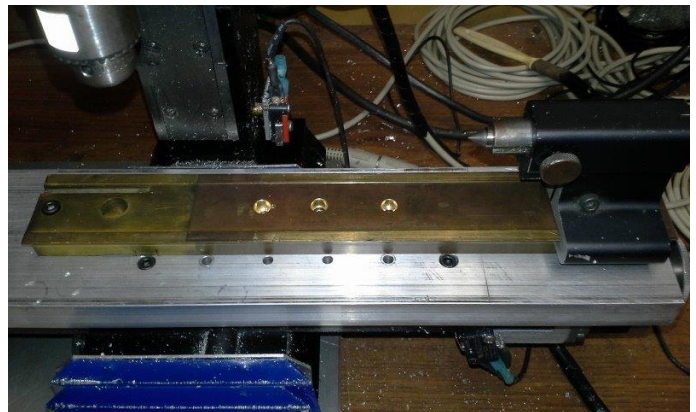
Brass lathe bed to enable the use of a standard lathe tailstock
